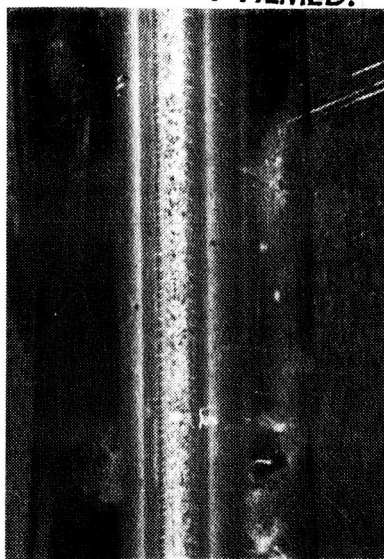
PHOTOGRAPHS of PHASE IIB A.C. WELDS
